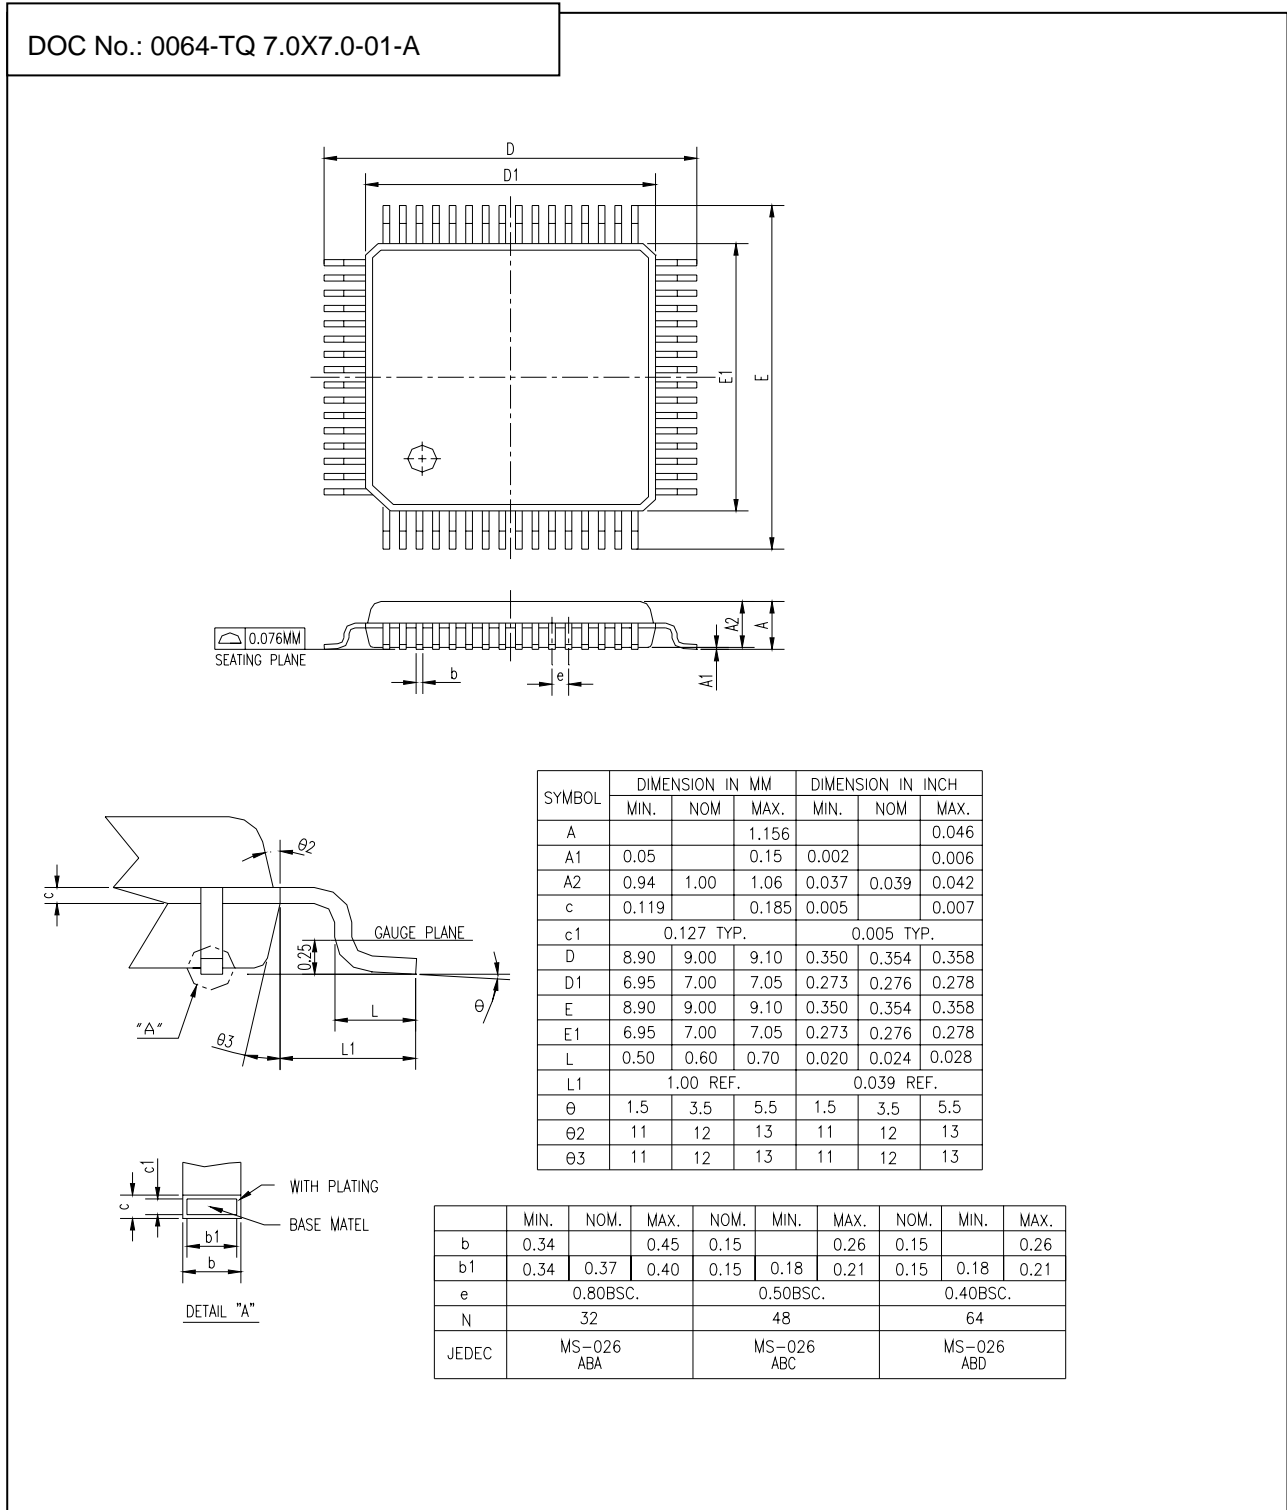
64 Pin TQFP 7.0x7.0x1.0 mm Package Outline Dimension
